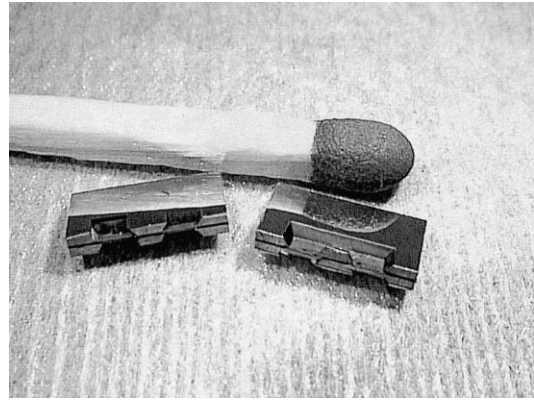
Photograph of the micromachined valve part (sawed over the centerline to show the sandwich construction).
